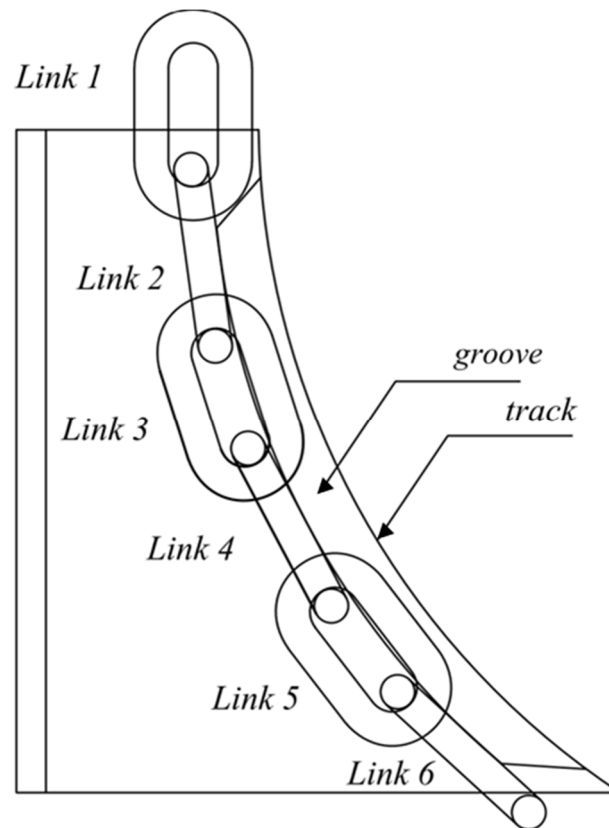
Sketch of mooring chain passing over the bending shoe
